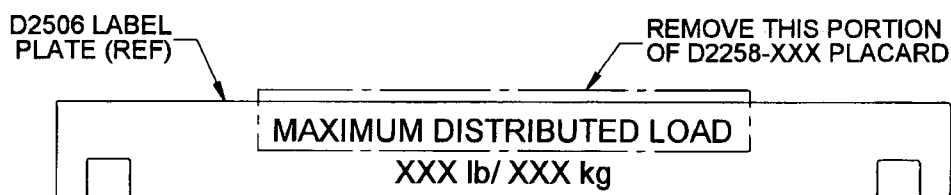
PARTIAL REMOVAL OF D2258-XXX PLACARD
